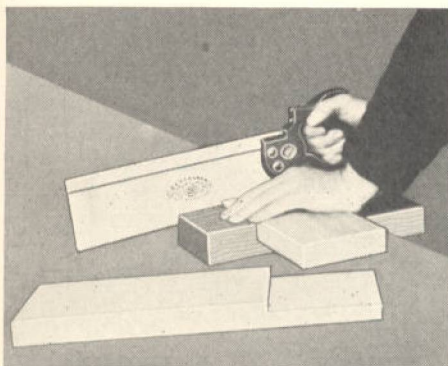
Cutting shoulders of half lap joint with Atkins SILVER STEEL Back Saw No. 2, in bench hook.
